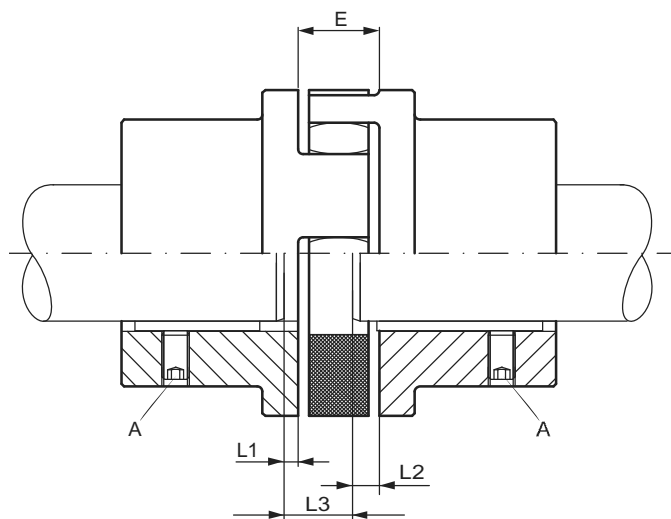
Mounting dimensions of the ROTEX coupling at the HSS (input shaft) – motor adapter
